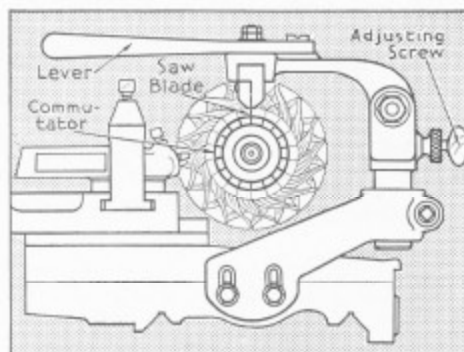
End view of Mica Undercutting Attachment mounted on lathe.
